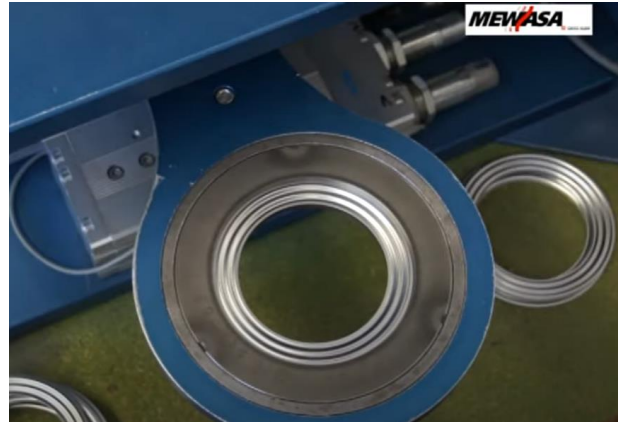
Stamped metal diaphragm on a stand prepared for welding (Mewasa AG) [43]
